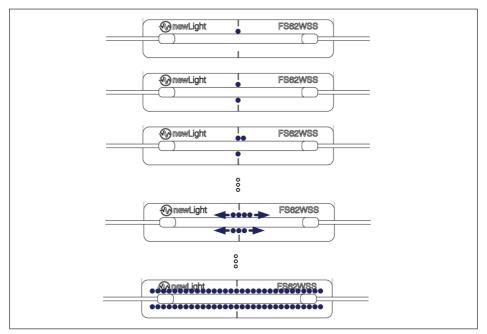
FS62WSS BRD welding procedure
